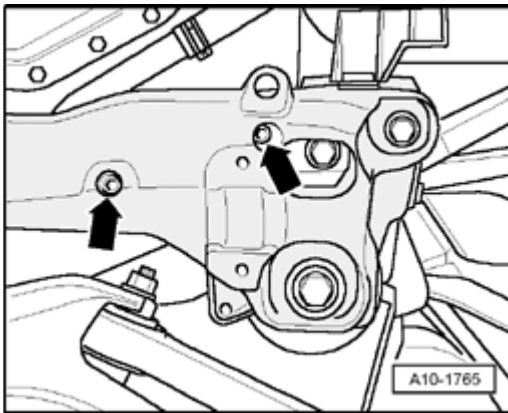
Removing/Installing Bolts For Engine Mount At Left/Right
